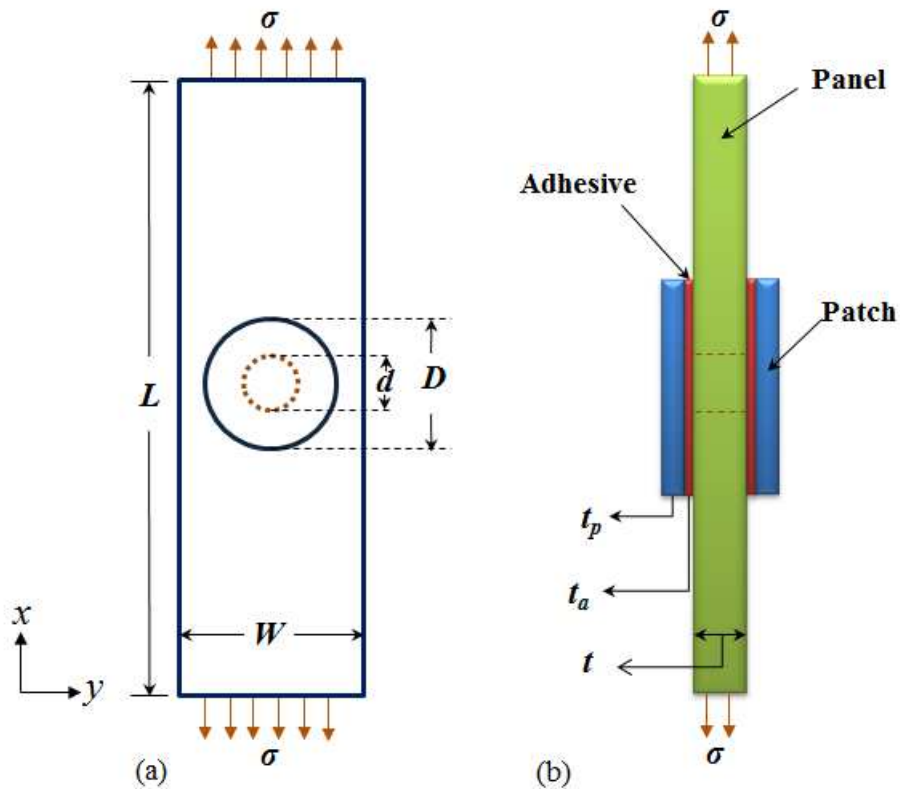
Specimen geometry of double sided repaired panel (a) front view (b) side view
